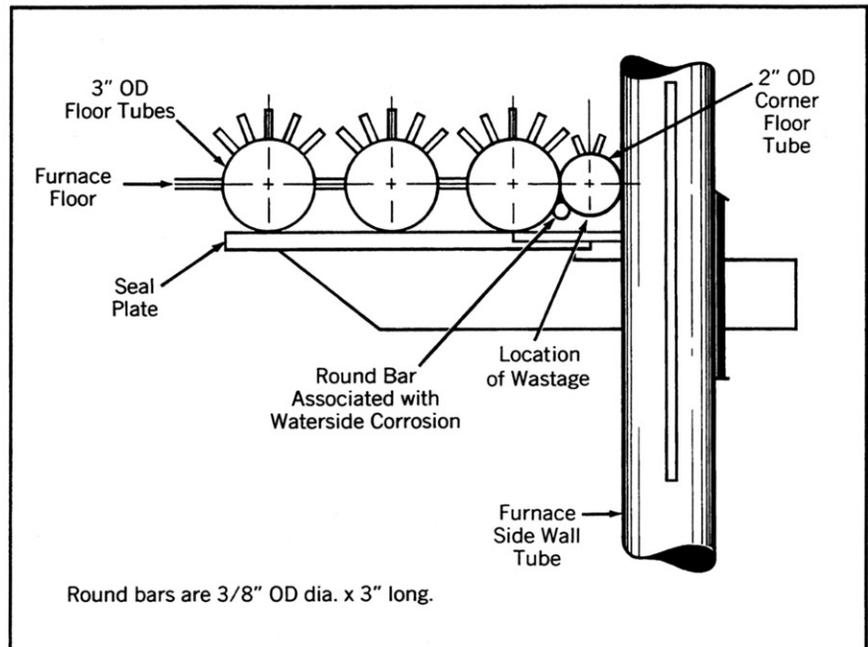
Example of 3/8" round bar welded on one side of the corner floor tube only and spaced on two foot centers.
